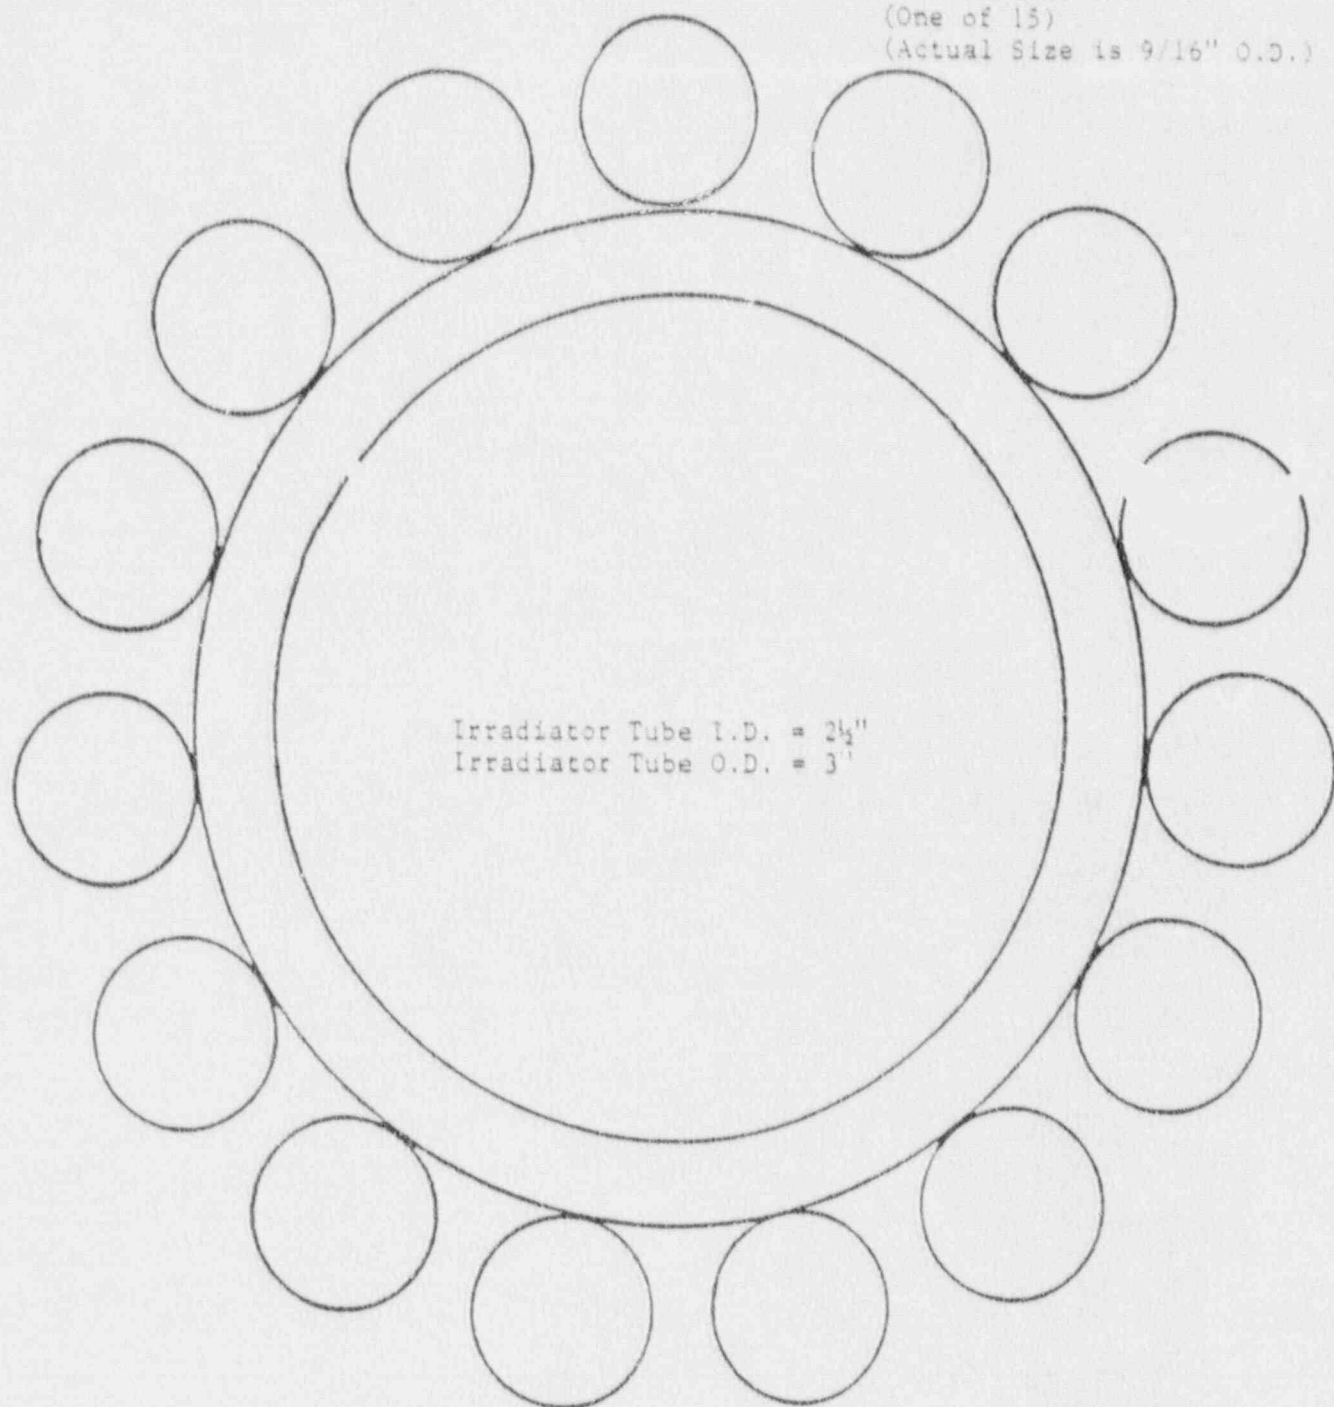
Top View of a Typical Irradiator Configuration, Using a 3-in Outside Diameter Irradiation Tube.
